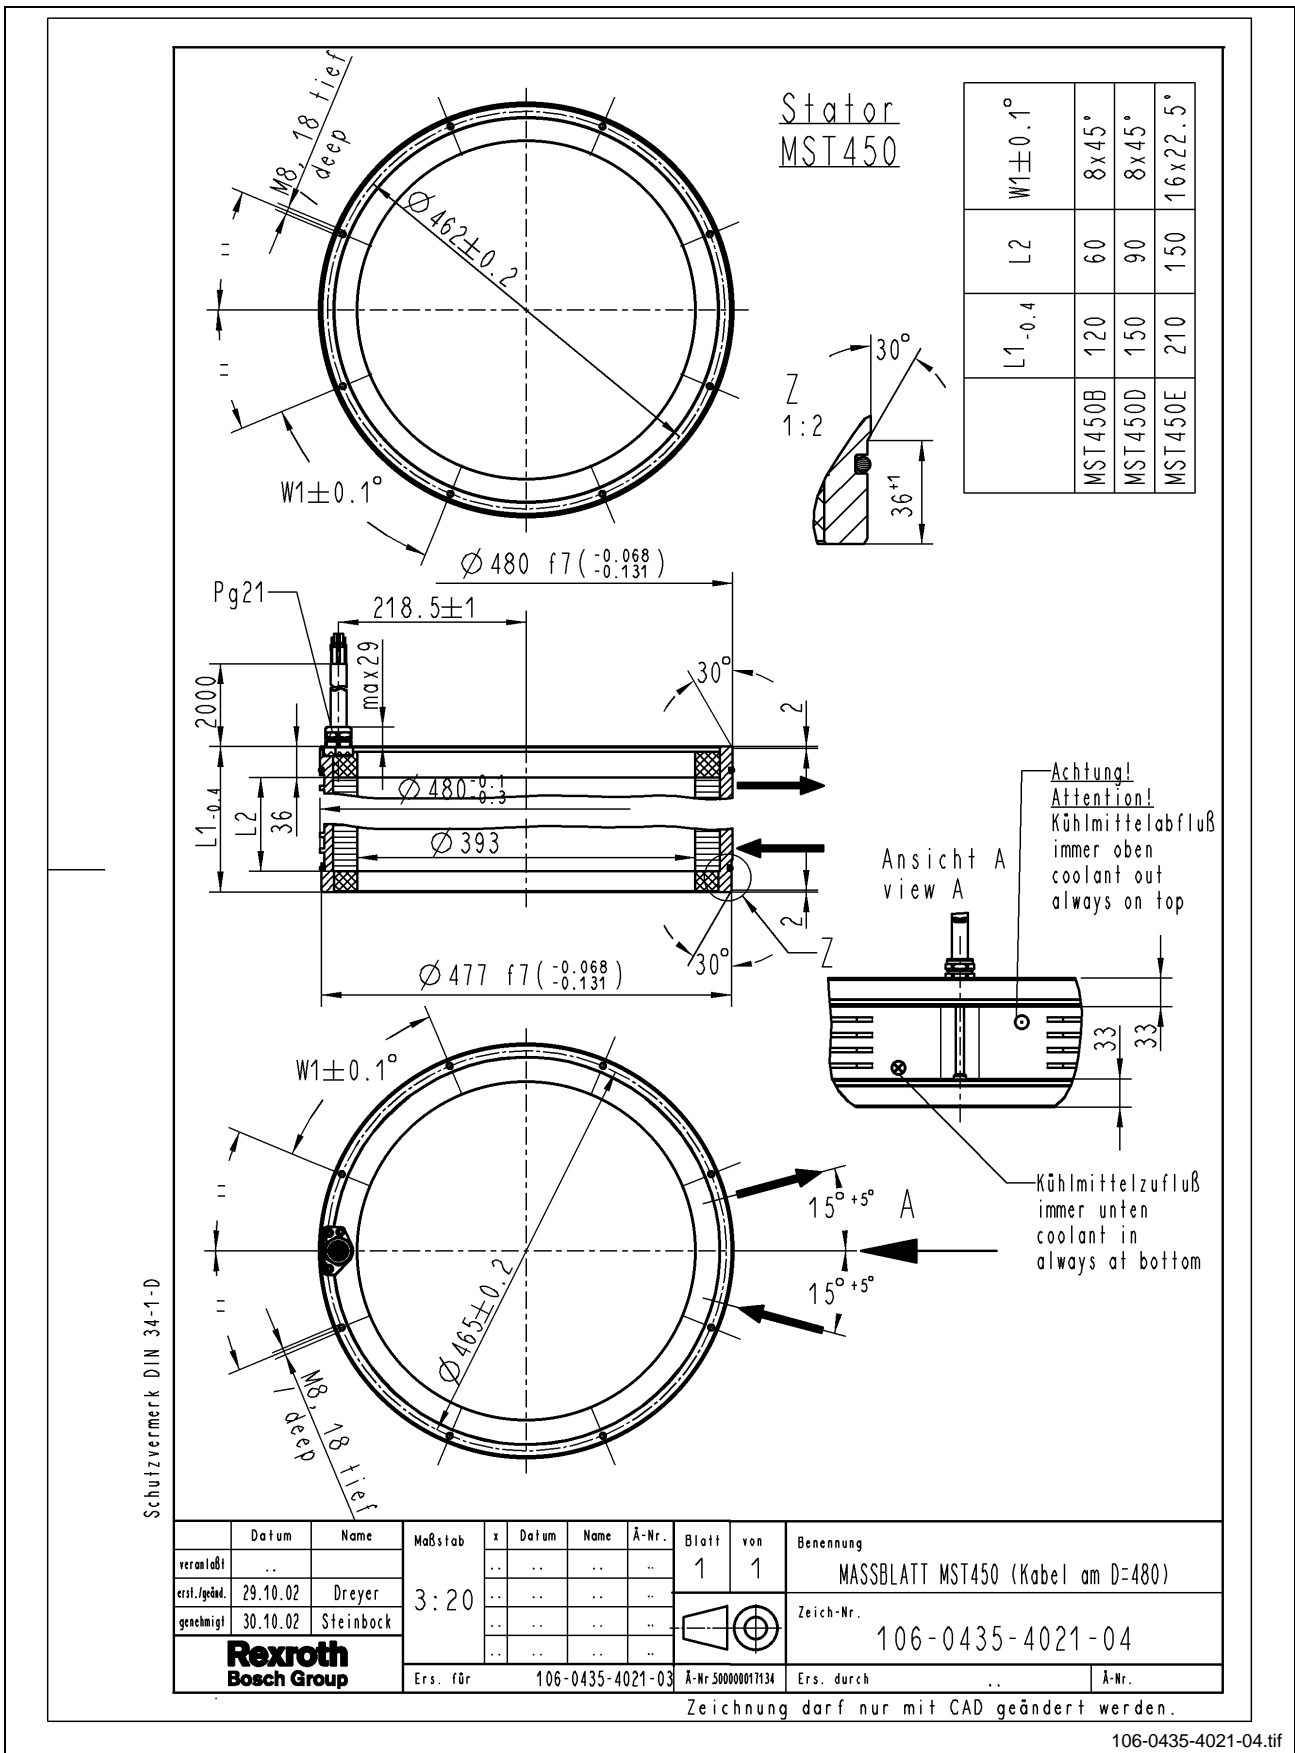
Dimension sheet MST450, electrical connection "CN"
